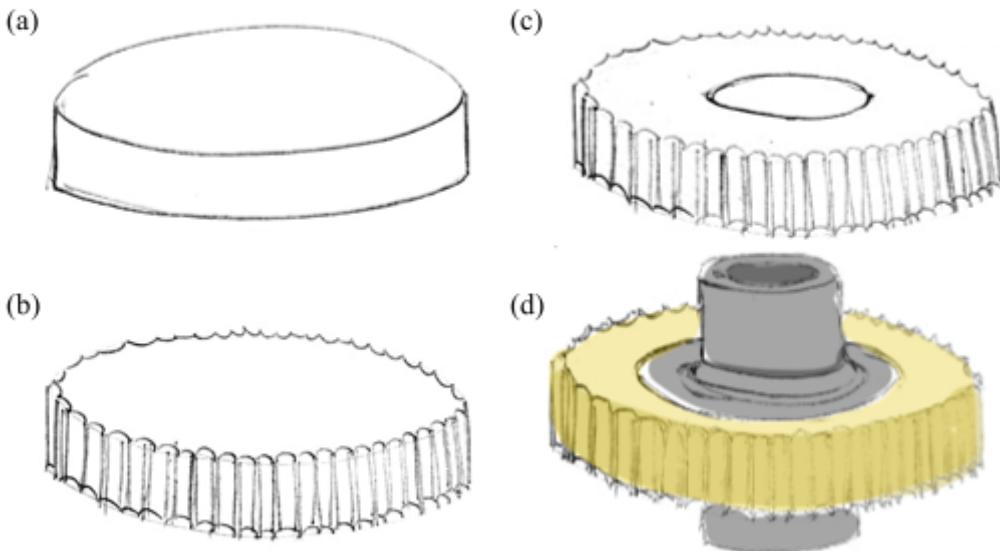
Manufacturing process of a worm wheel; (a) bulk deformation, (b) formation of gear teeth, (c) boring of worm wheel, and (d) output shaft inside worm wheel
